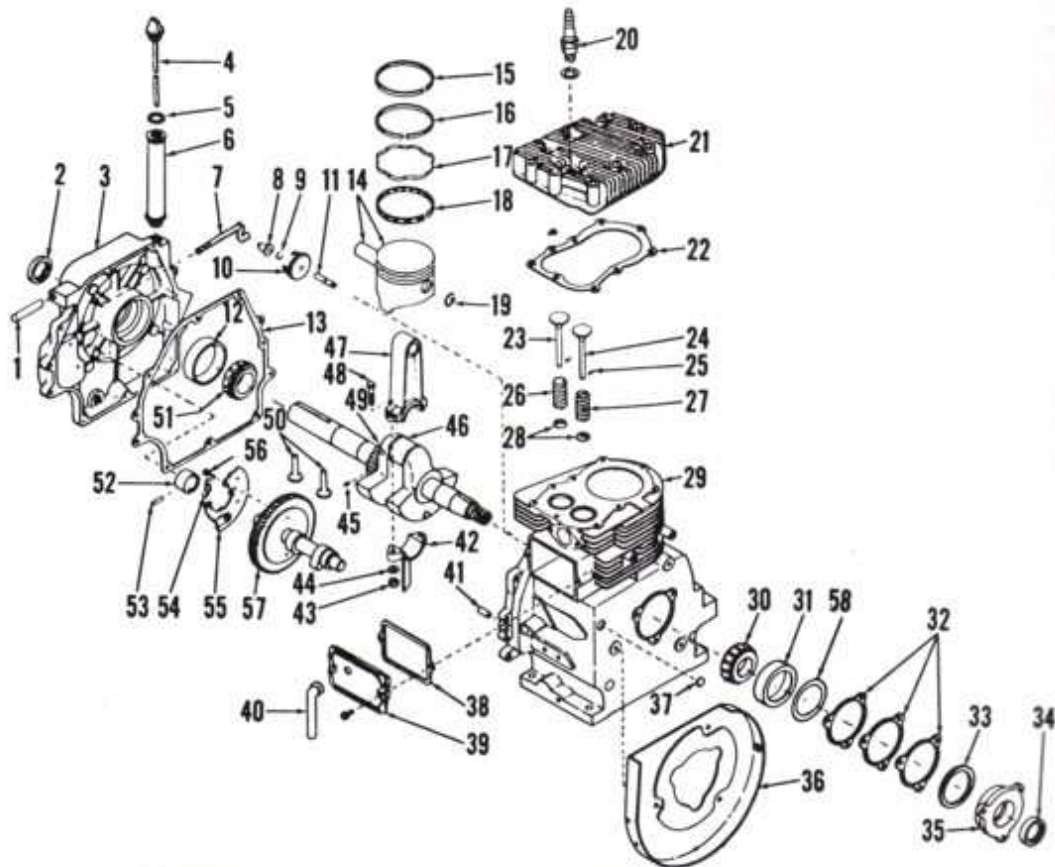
Exploded view of Model HH80, HH100 or HH120 horizontal crankshaft engine.
